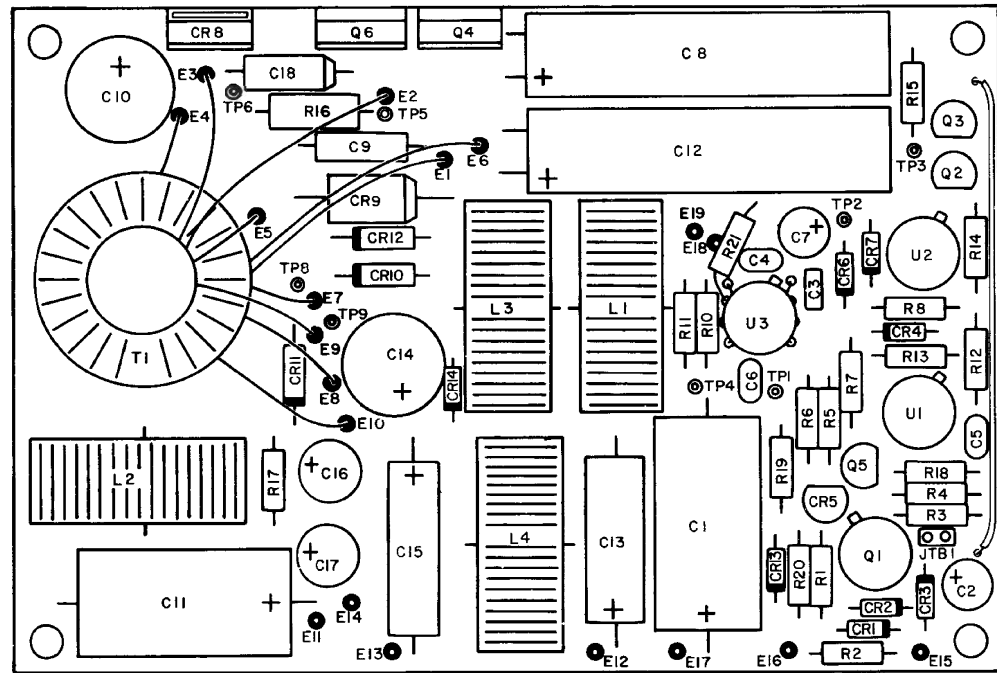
Motherboard PC Board Assembly (0000-5510-000-C)
